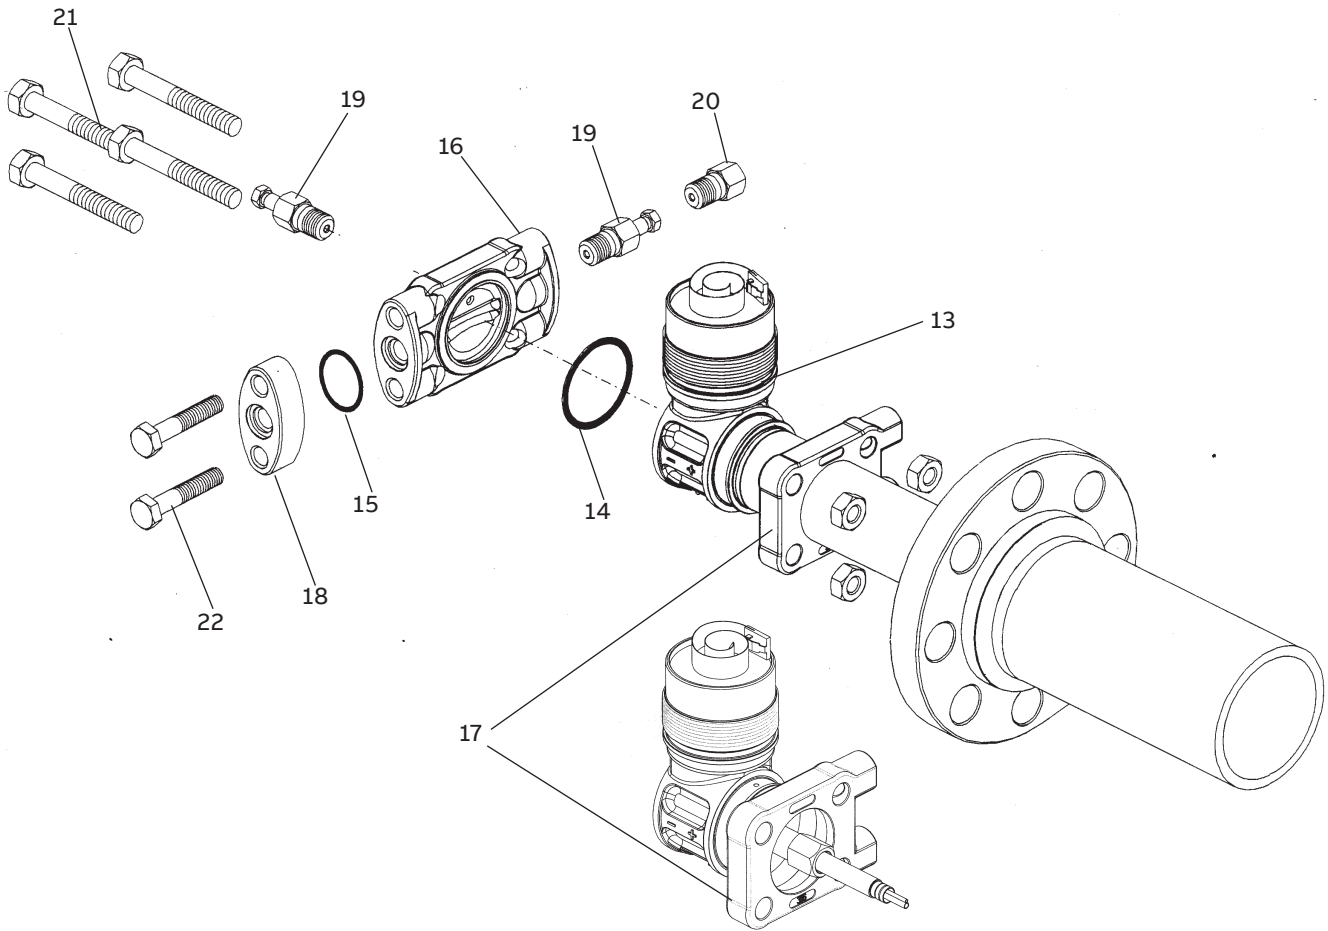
DP style transmitter bottom works of model 266DDH (direct mount seal) or 266DRH (remote seal)
